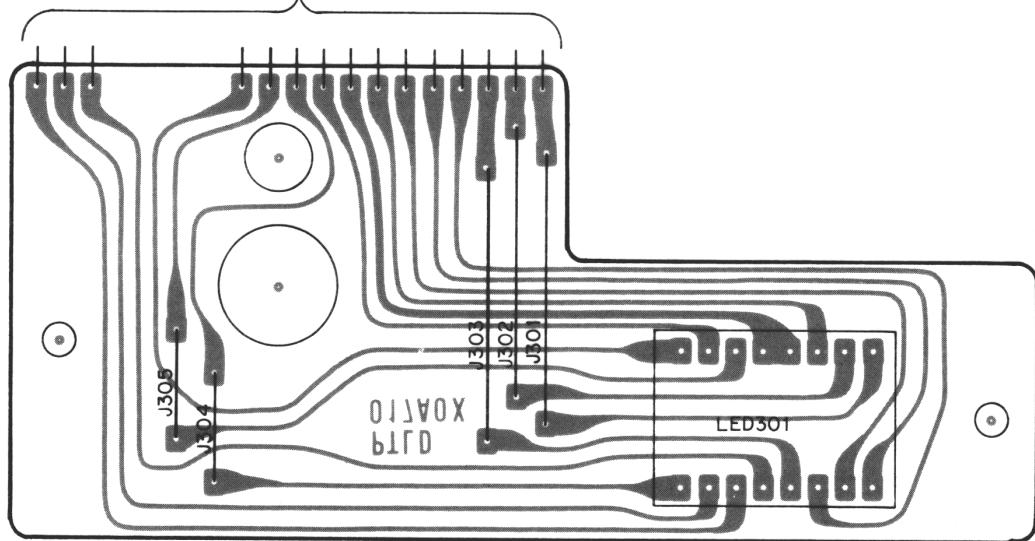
Main P.C. Board Component Outline, Model 2703
